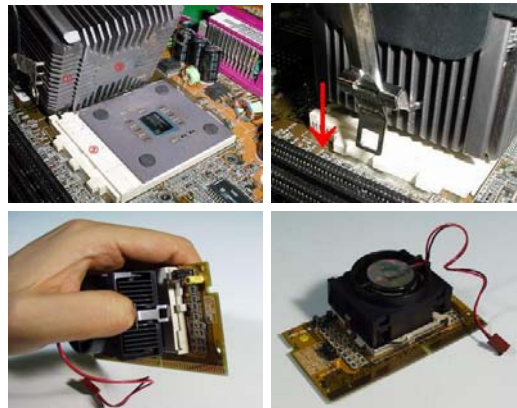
Steps Involved in CPU/Heat Sink Assembly
